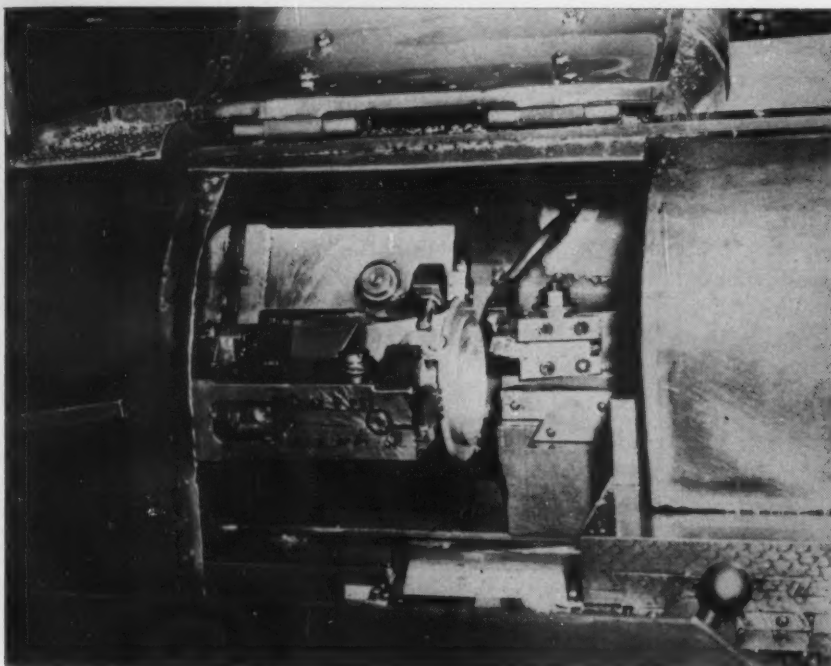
Setup in a Lipe Carbo lathe does rapid turning and facing operations on dryer covers held in a special air-operated chuck.
